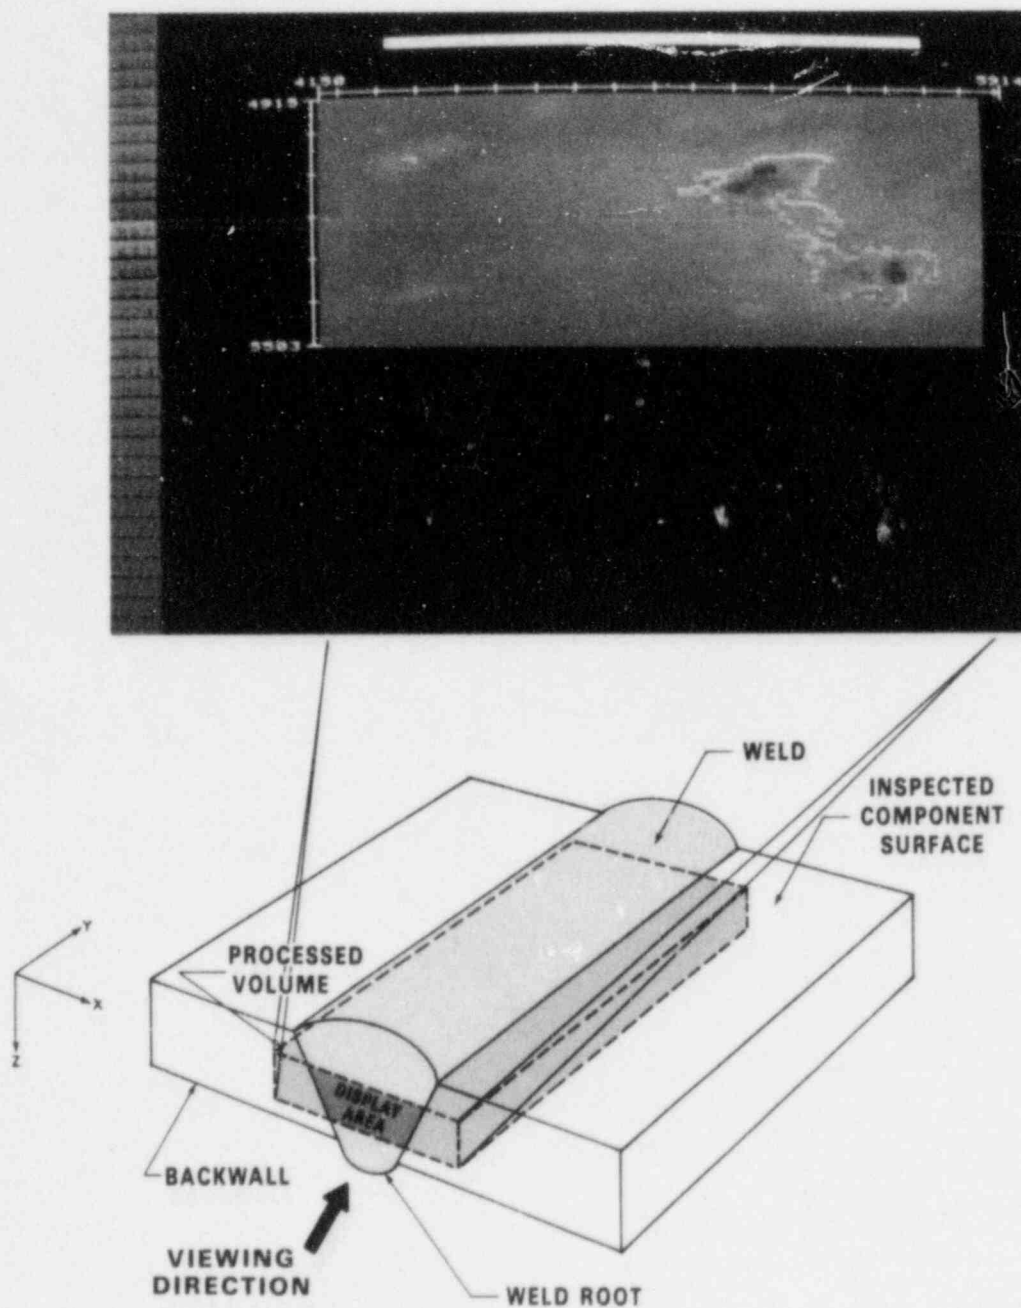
BUTT-WELDED CARBON STEEL PLATE SPECIMEN - SLAG INCLUSION
